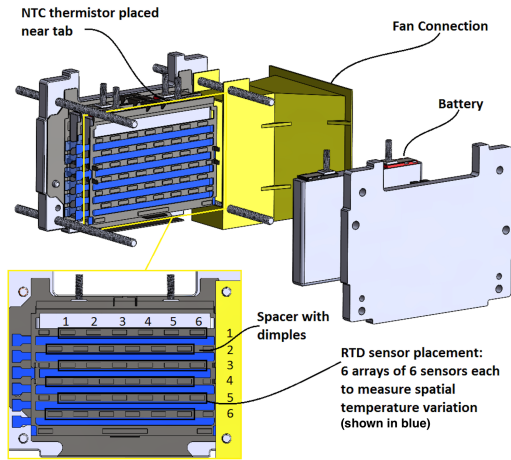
Exploded view of the fixture showing locations of temperature sensors on the surface of the battery
